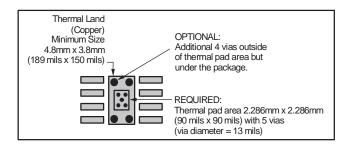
8-Pin PowerPAD PCB Etch and Via
